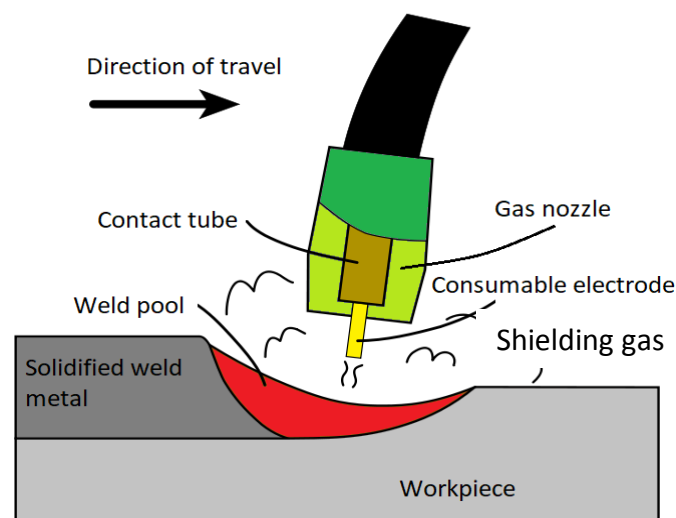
Gas Metal Arc Welding (GMAW) diagram (Wikimedia, 2012)
